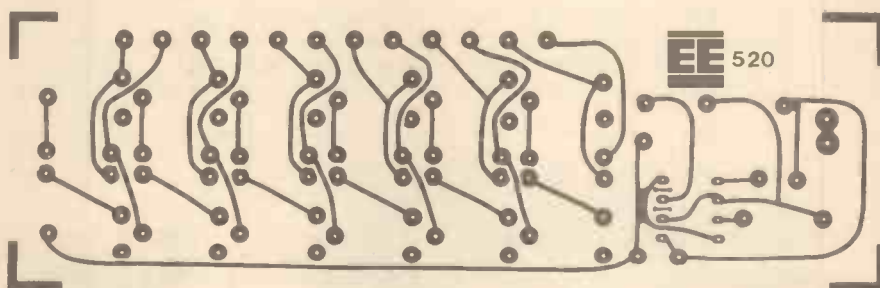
Top, the printed circuit board, actual size—available from the EE PCB Service; above, the component overlay.
